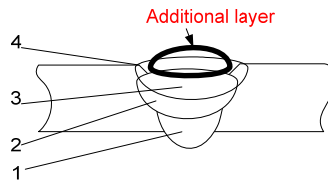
Application scheme of “Weld Toe Tempering Technique”
